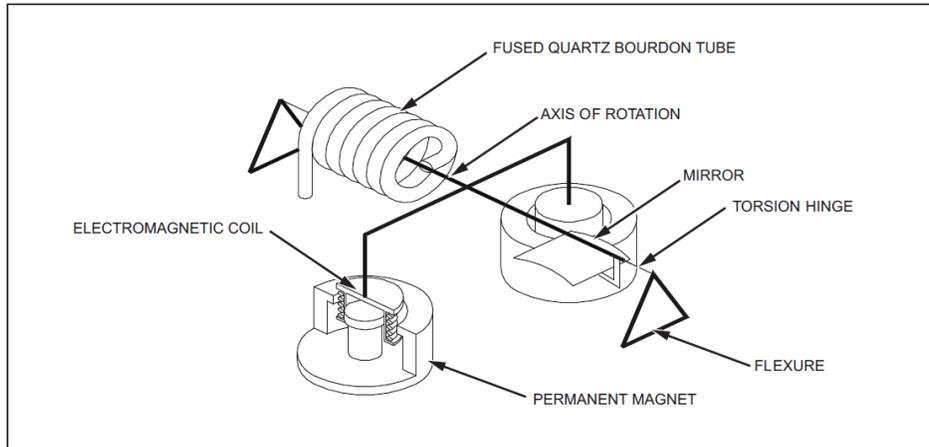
Fluke Quartz Bourdon Tube Sensor Assembly (Drawing).
